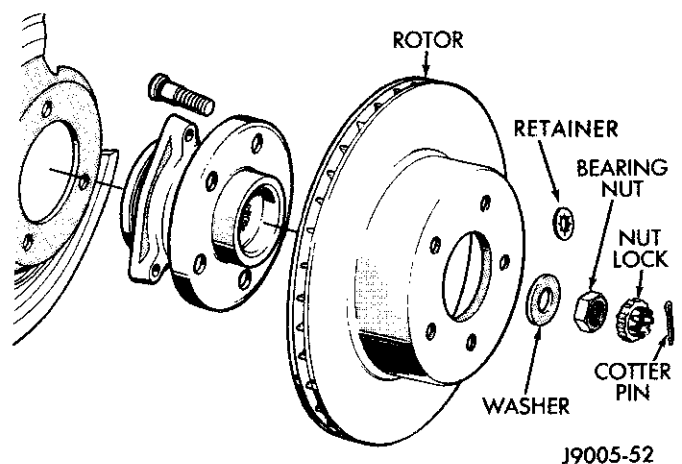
Four Wheel Drive Rotor And Hub—XJ/MJ/YJ
